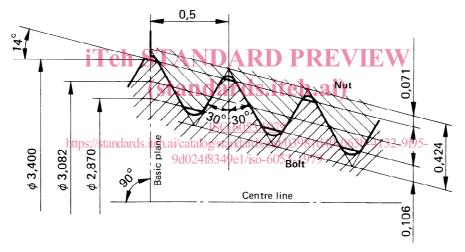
Profile and basic dimensions of tapered threads (nut and bolt)
